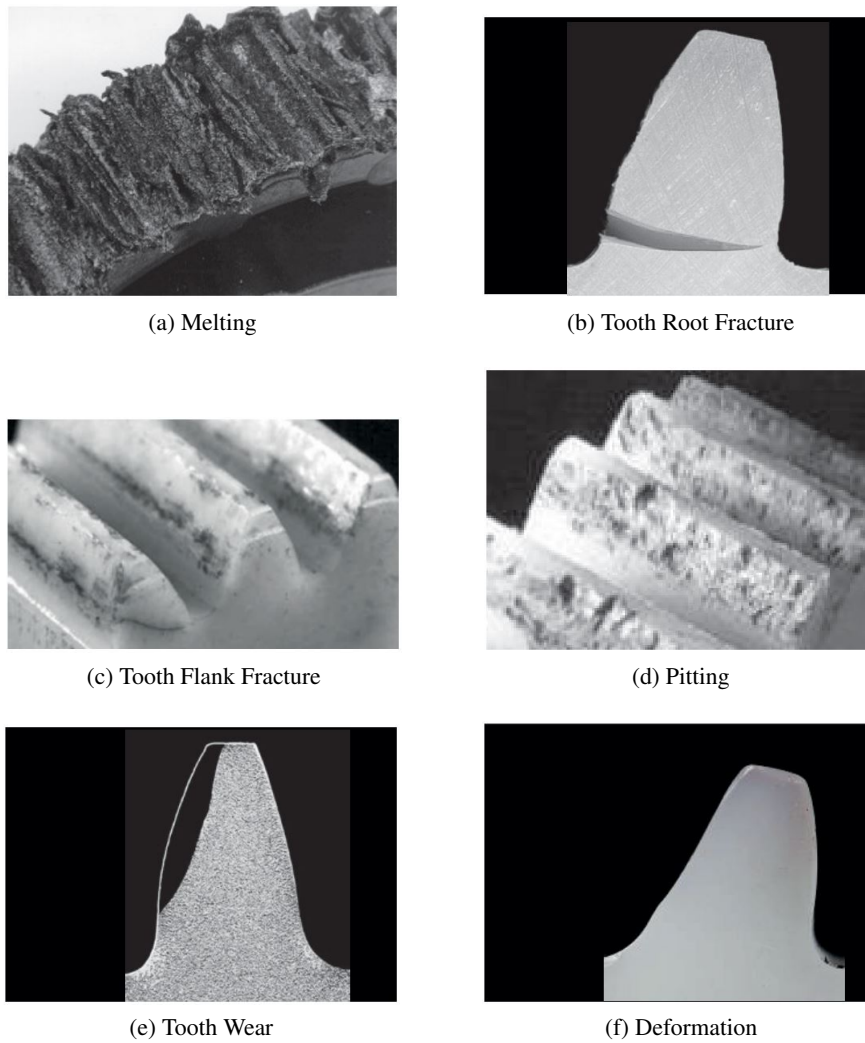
Polymer gear failure mechanisms [8].
